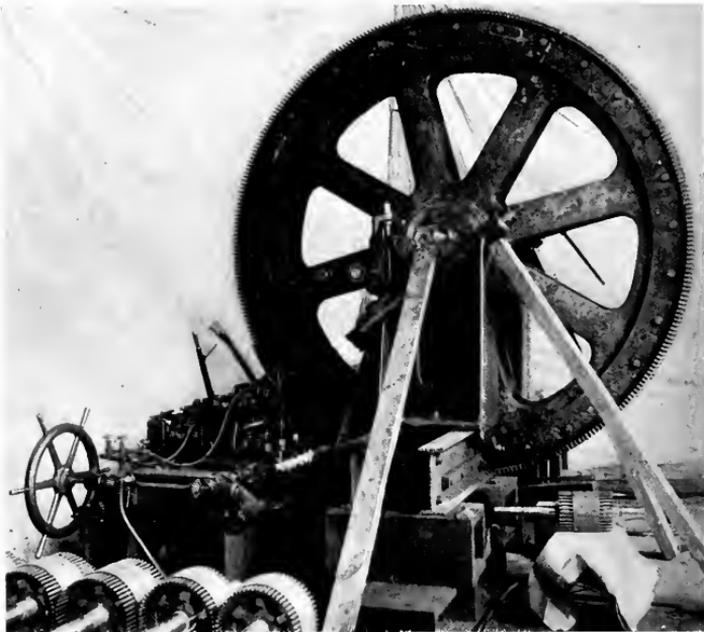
Showing Latitude in the Size of Work Performed on Electric Welding Machines. The large rotor is for a 1400-h.p. motor and the small rotors are for 5-h.p. machines
